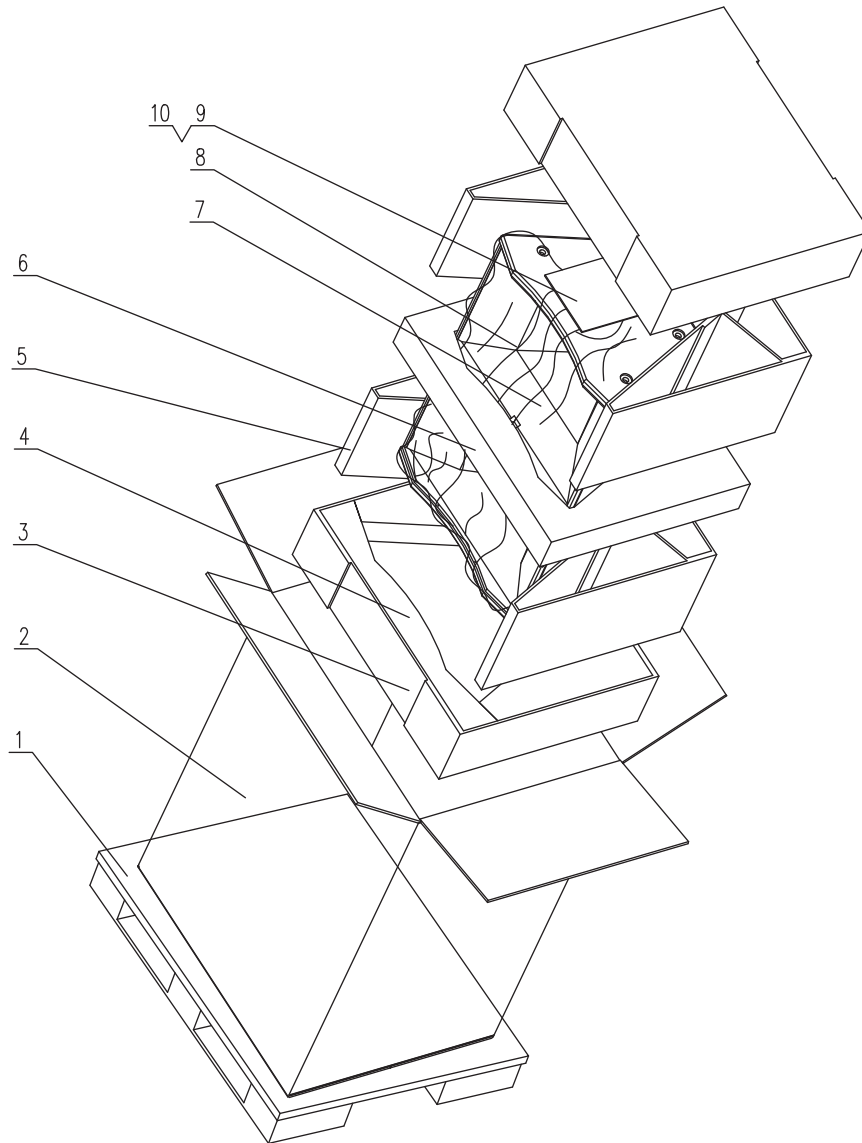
Panaray LT 9702 WR Loudspeaker Packaging View
